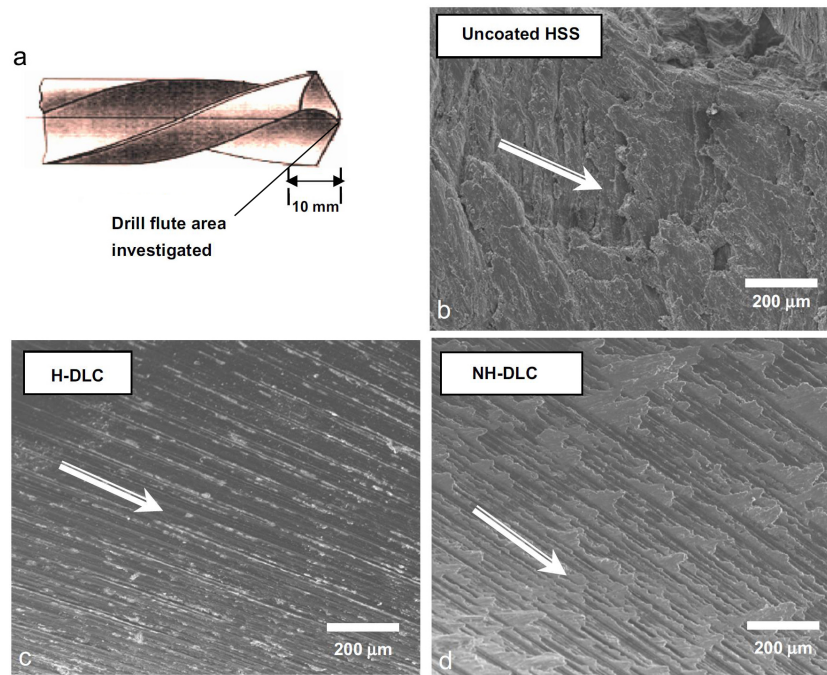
SEM secondary electron images showing the aluminum adhesion to the drill flutes: (a) schematic representation of drill flute showing the area investigated, (b) uncoated HSS tool, (c) H-DLC-coated tool, and (d) NHDLC-coated tool. The flute surface of the uncoated HSS drill was almost entirely covered by adhered aluminium. The direction of the chip flow is shown by the arrow [100].
